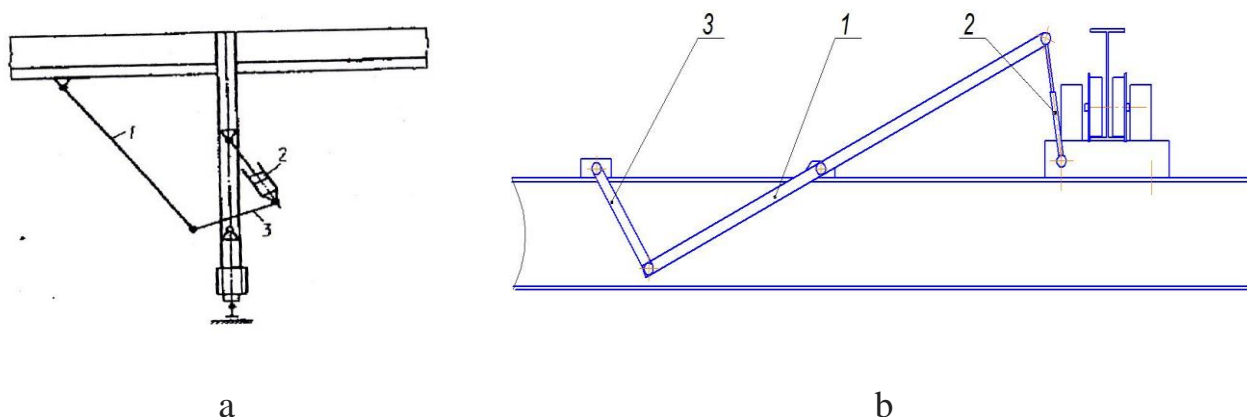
Installation of the lever-hydraulic damper on the crane :
